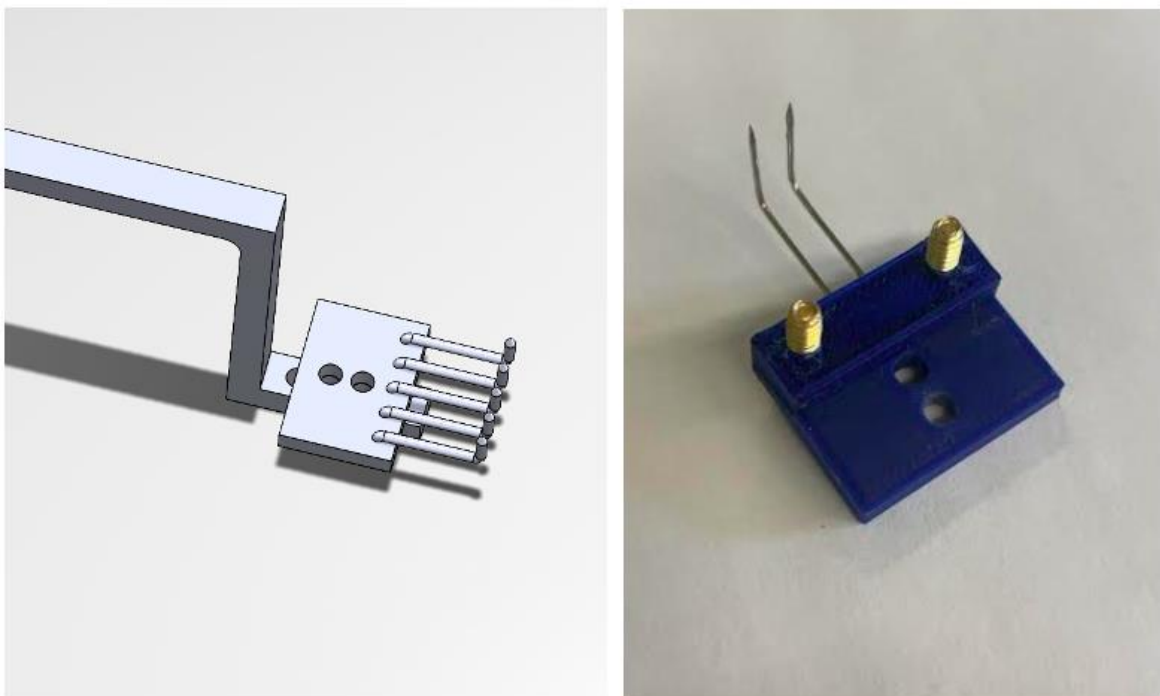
Mounting system concept design (a) and fabricated mounting system (b)
